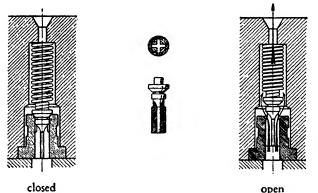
THE FUEL PUMP DELIVERY VALVE
